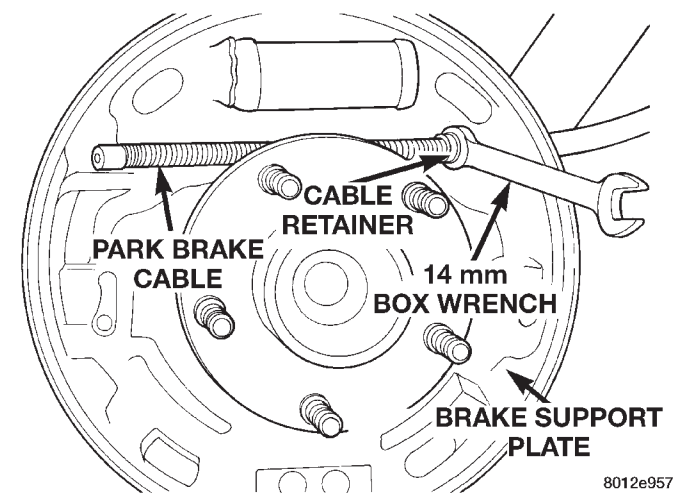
Removing Park Brake Cable From Brake Support Plate
